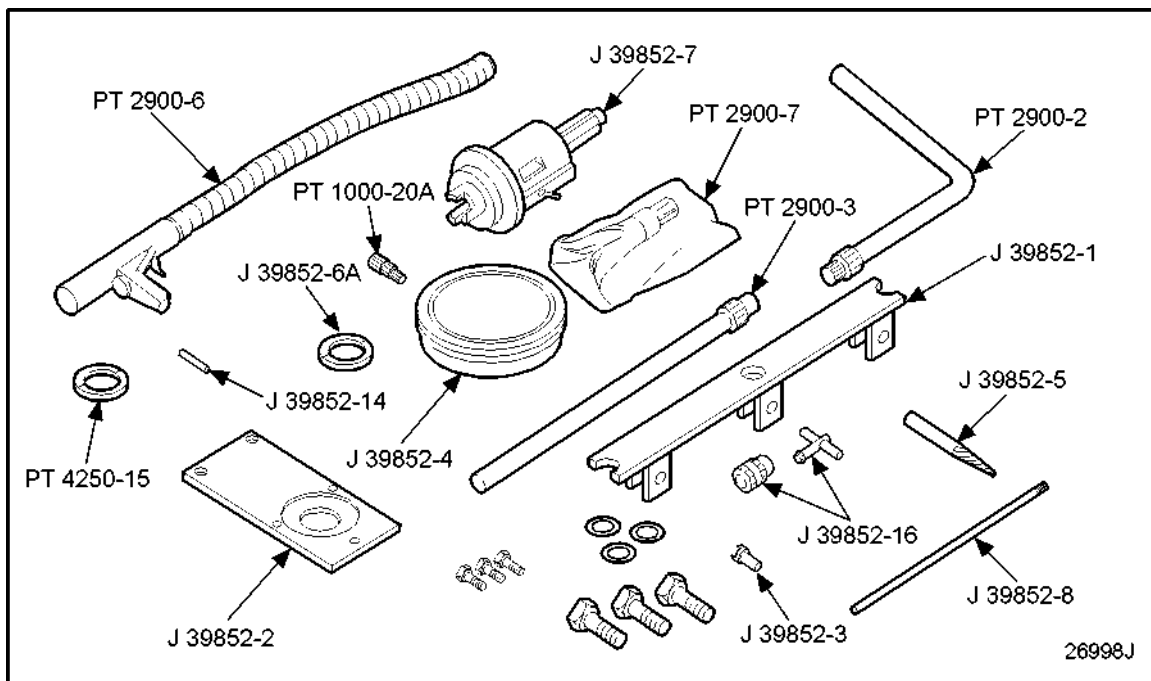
Top Liner Cooler Modification Kit,J 39852
